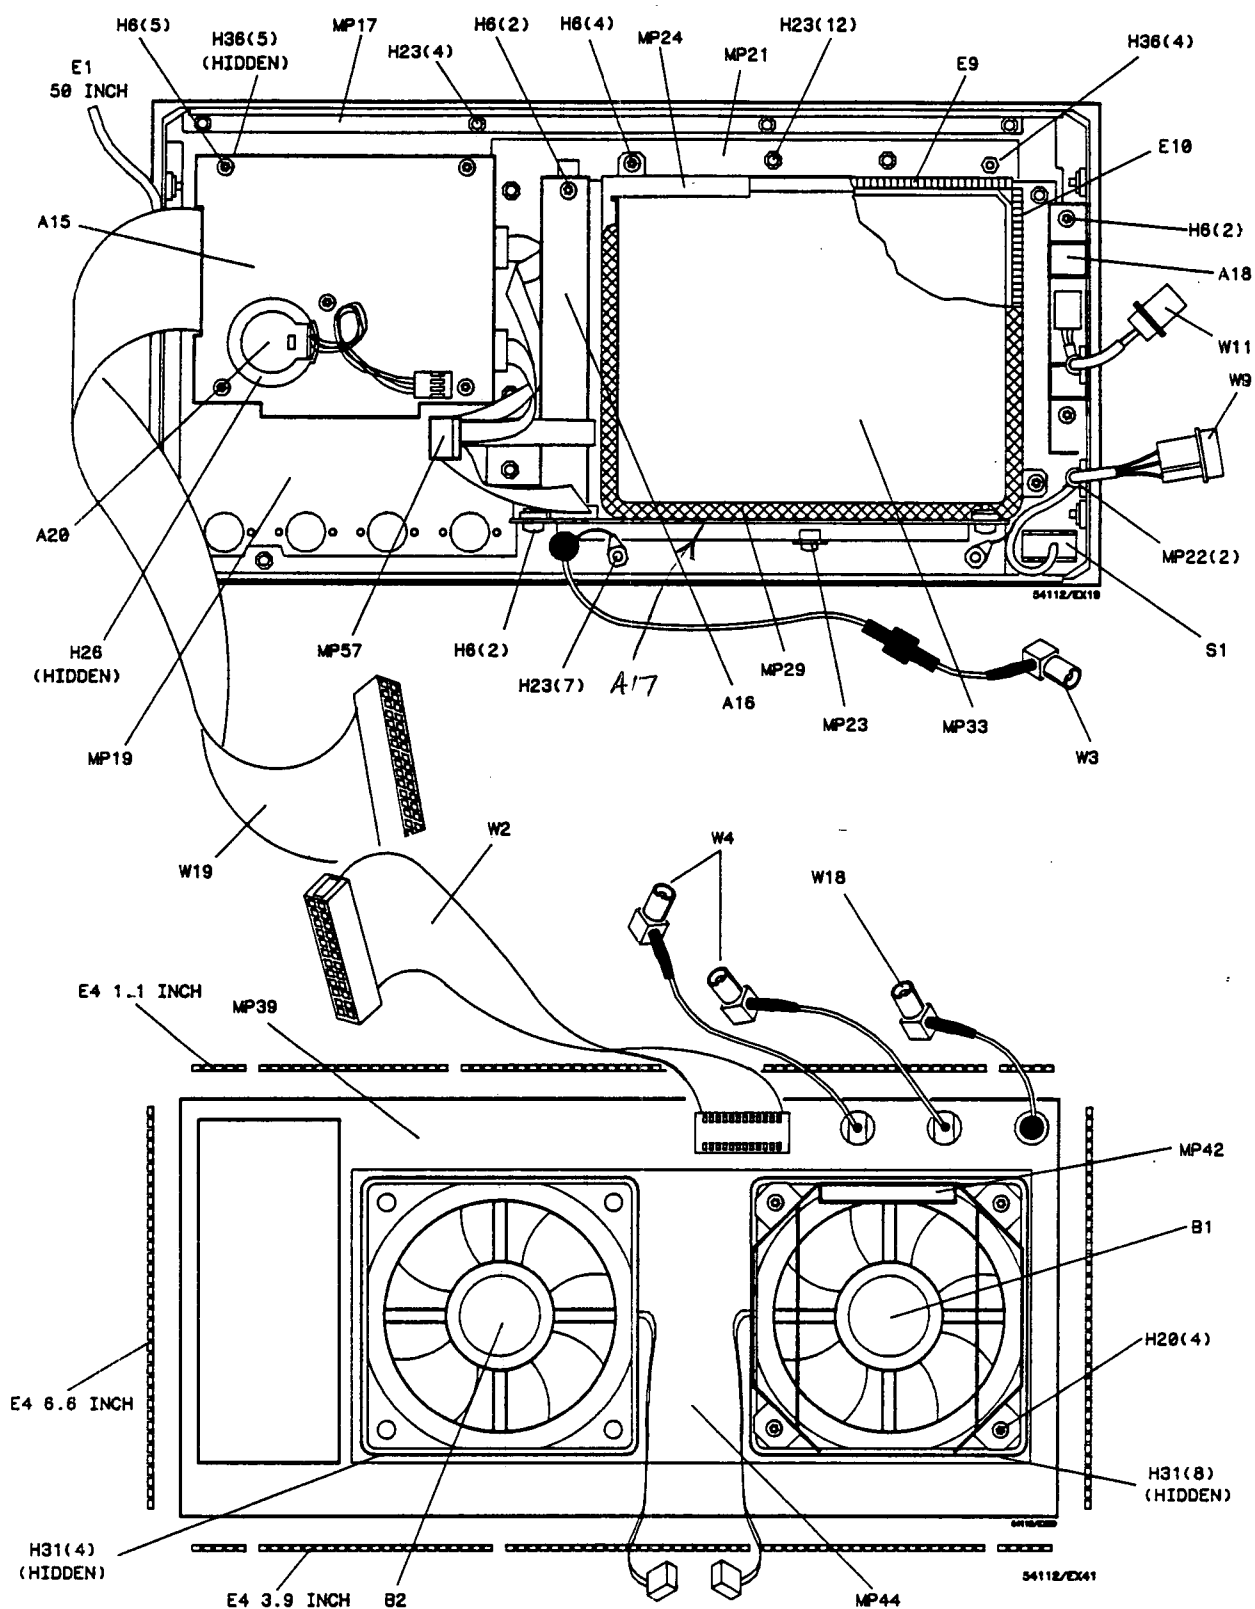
Mainframe Parts Locations (sheet 5 of 7)
